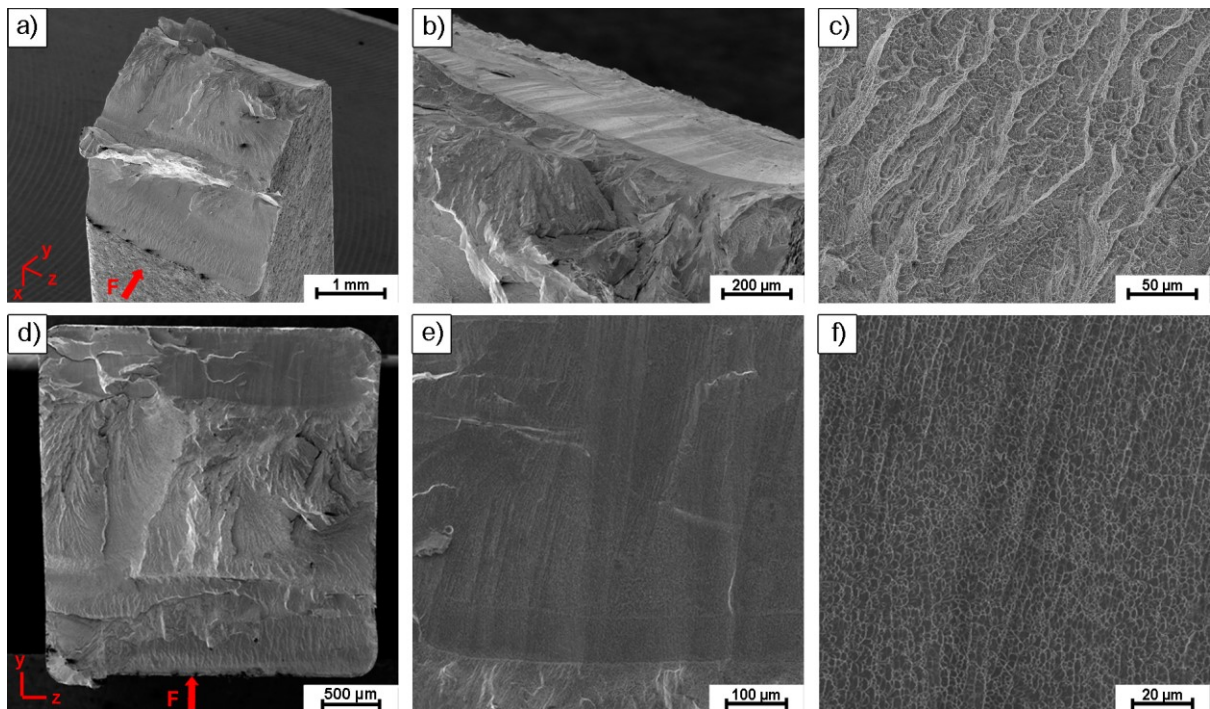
Fracture surface of the horizontally built sample H11. The 4 point bending test were carried out in the testing orientation  $H90^\circ$ . a) 3D overview of the fracture surface, b) smooth fracture plane on the side where tensile stresses were present, c) vein-like pattern of the groove, evolved on the side of compression, d) top view, e) and f) magnified micrographs of the smooth fracture plane and the fine pattern on it.
